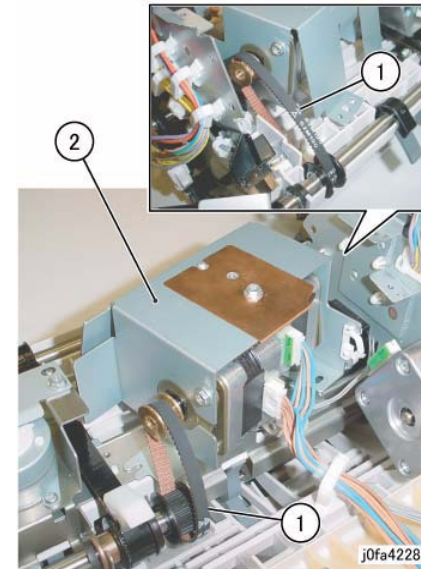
Removing the Eject/Set Clamp Motor Assembly
